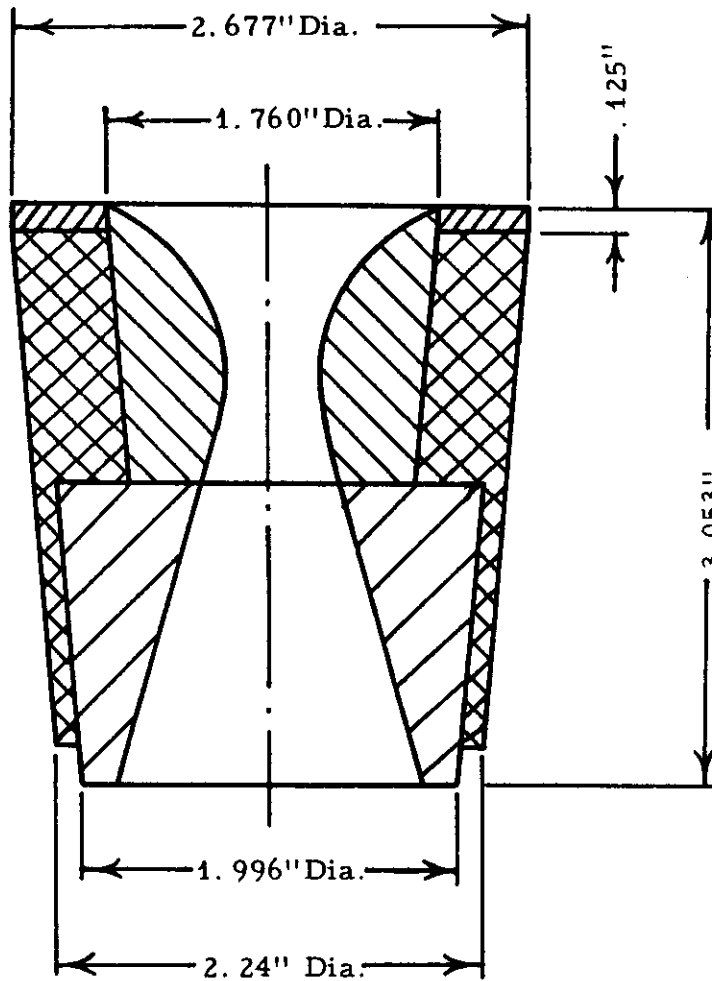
Graphite Nozzle Insert and Back-up Assembly for Test Motor
